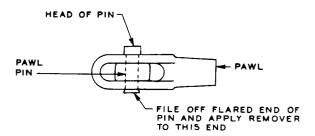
Rotary Pawl with Headed-Type Pawl Pin Used for Replacement Purposes
